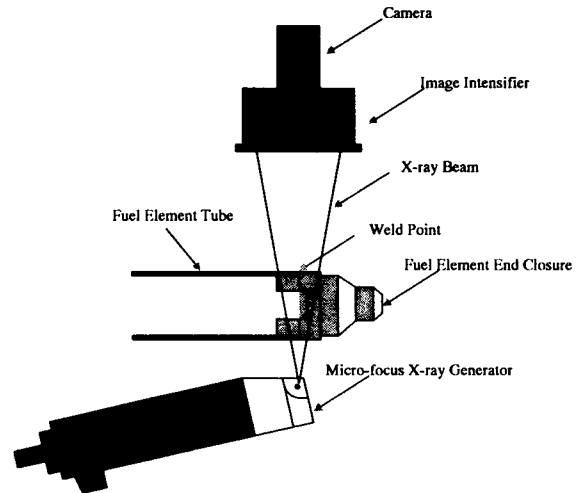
The precise X-ray inspection of a fuel element end closure weld
